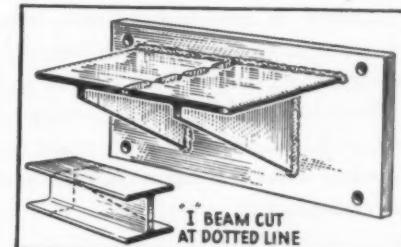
Alternate welded design for low-cost construction. Standard "I" beams are cut and fillet welded to supporting member.
